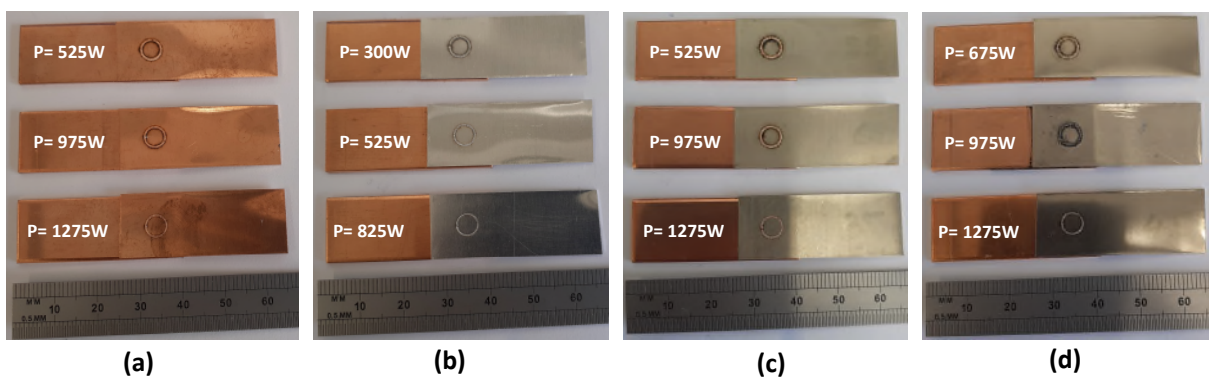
Laser welded (a) 0.3 mm Cu tab to 1.5 mm Cu busbar (b) 0.3 mm Al tab to 1.5 mm Cu busbar (c) 0.3 mm Cu[Ni] tab to 1.5 mm Cu busbar (a) 0.3 mm Ni tab to 1.5 mm Cu busbar
